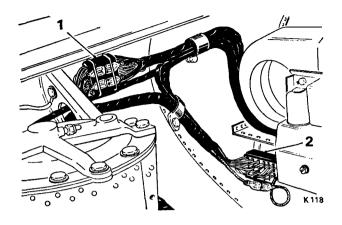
ENGINE LOOM PLUG AND SOCKET
